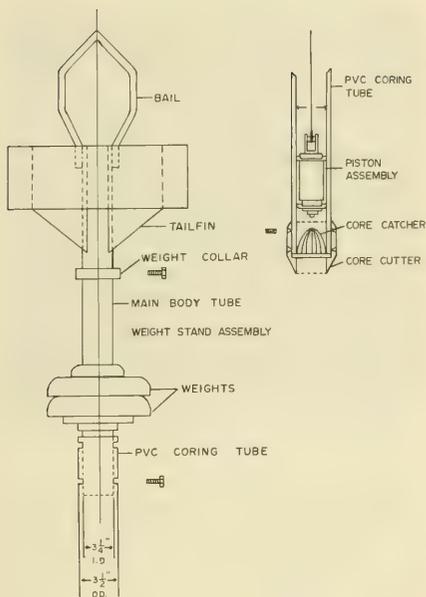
The Hydro-Plastic (PVC) piston corer assembly.
